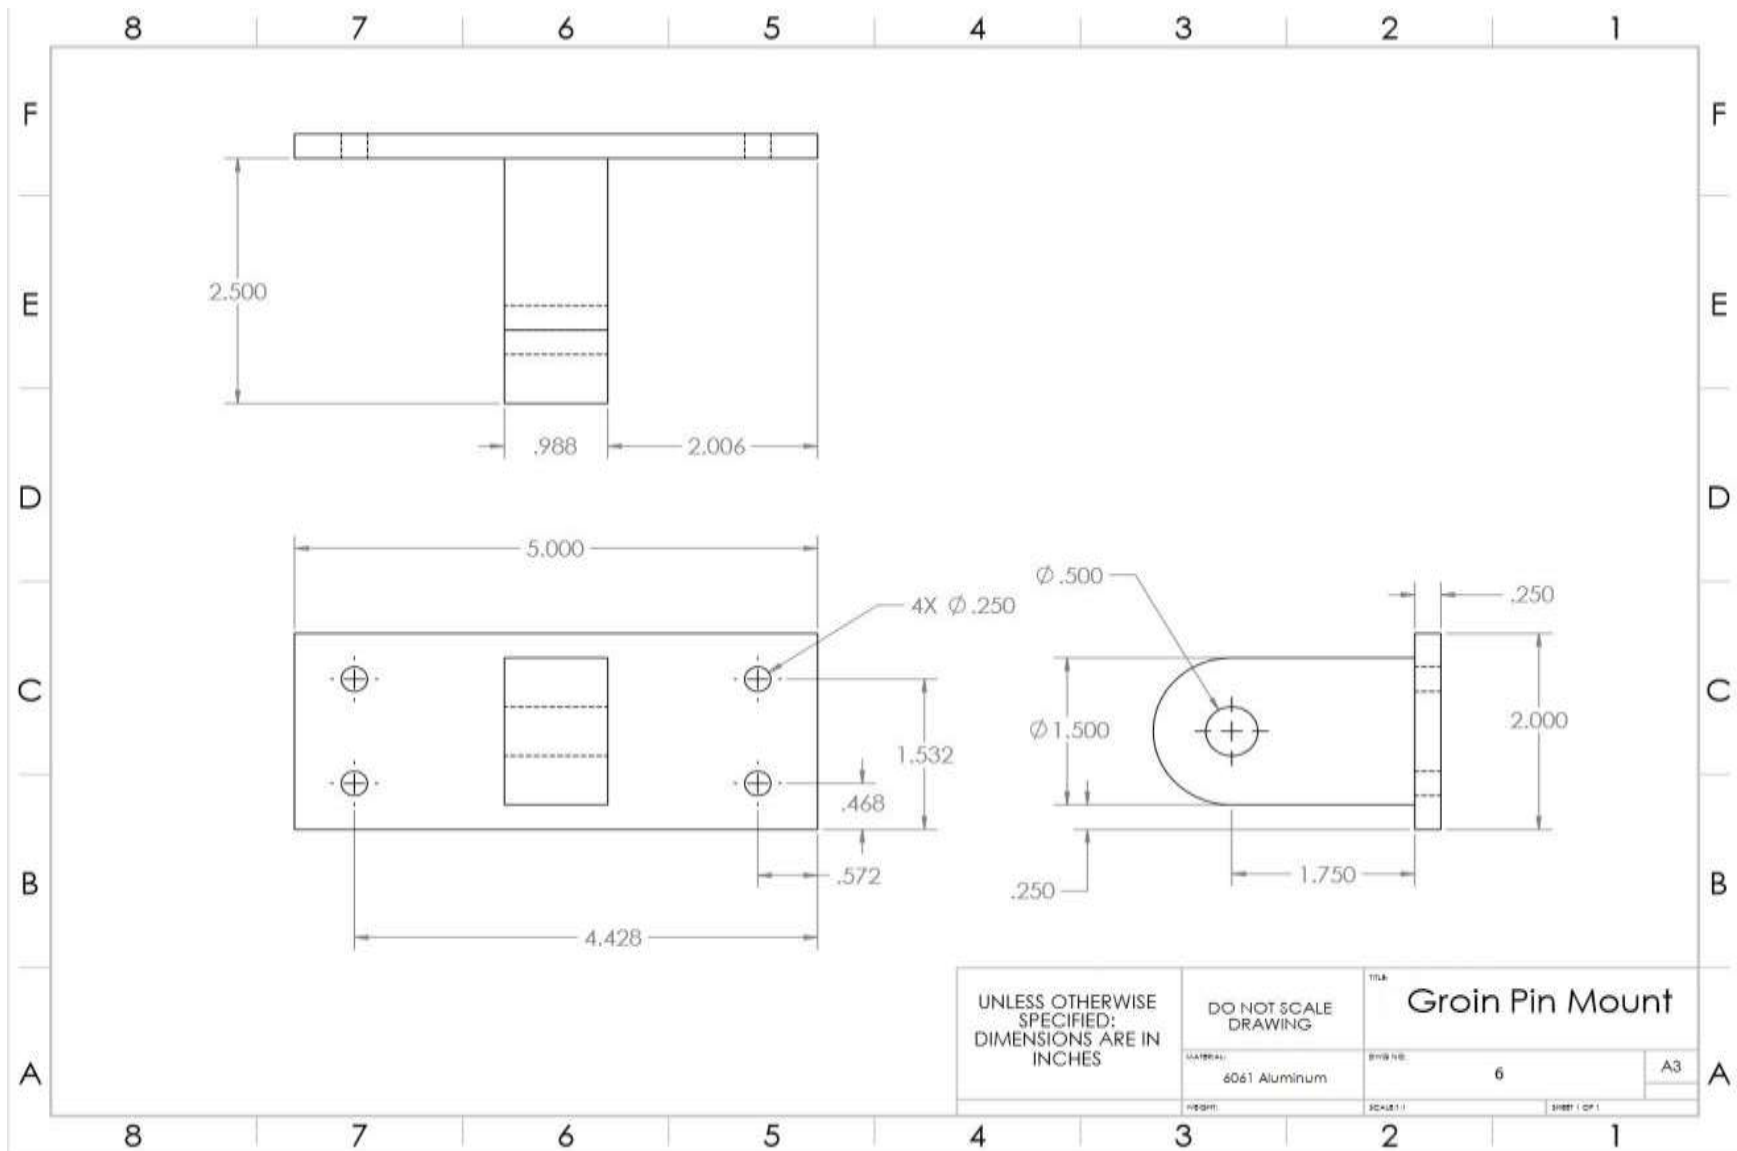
6. Mechanical Drawing of Groin Pin Mount.
